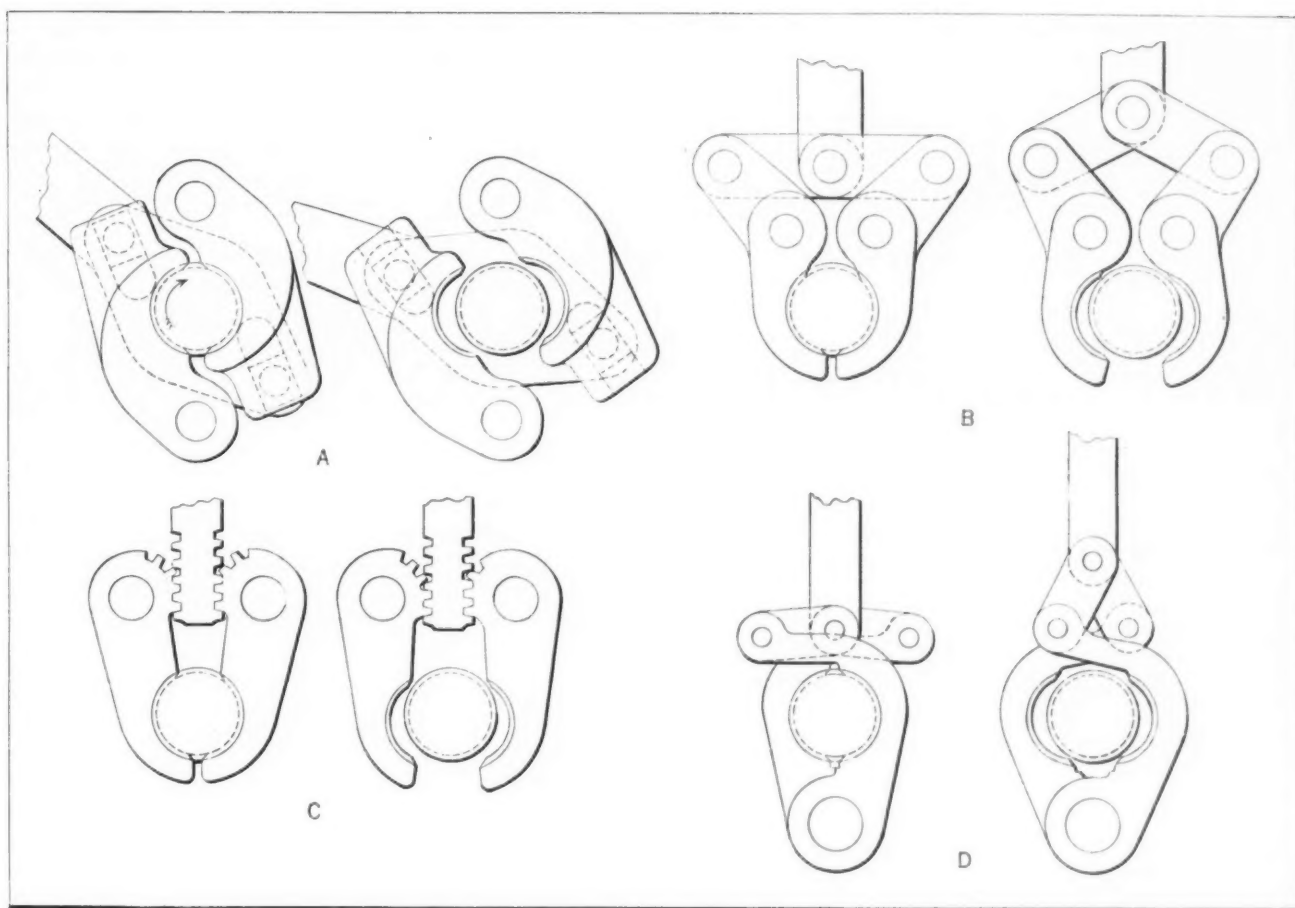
Diagrams Showing Open and Closed Positions of Four Different Arrangements for Engaging Half-nuts with Lead-screws
